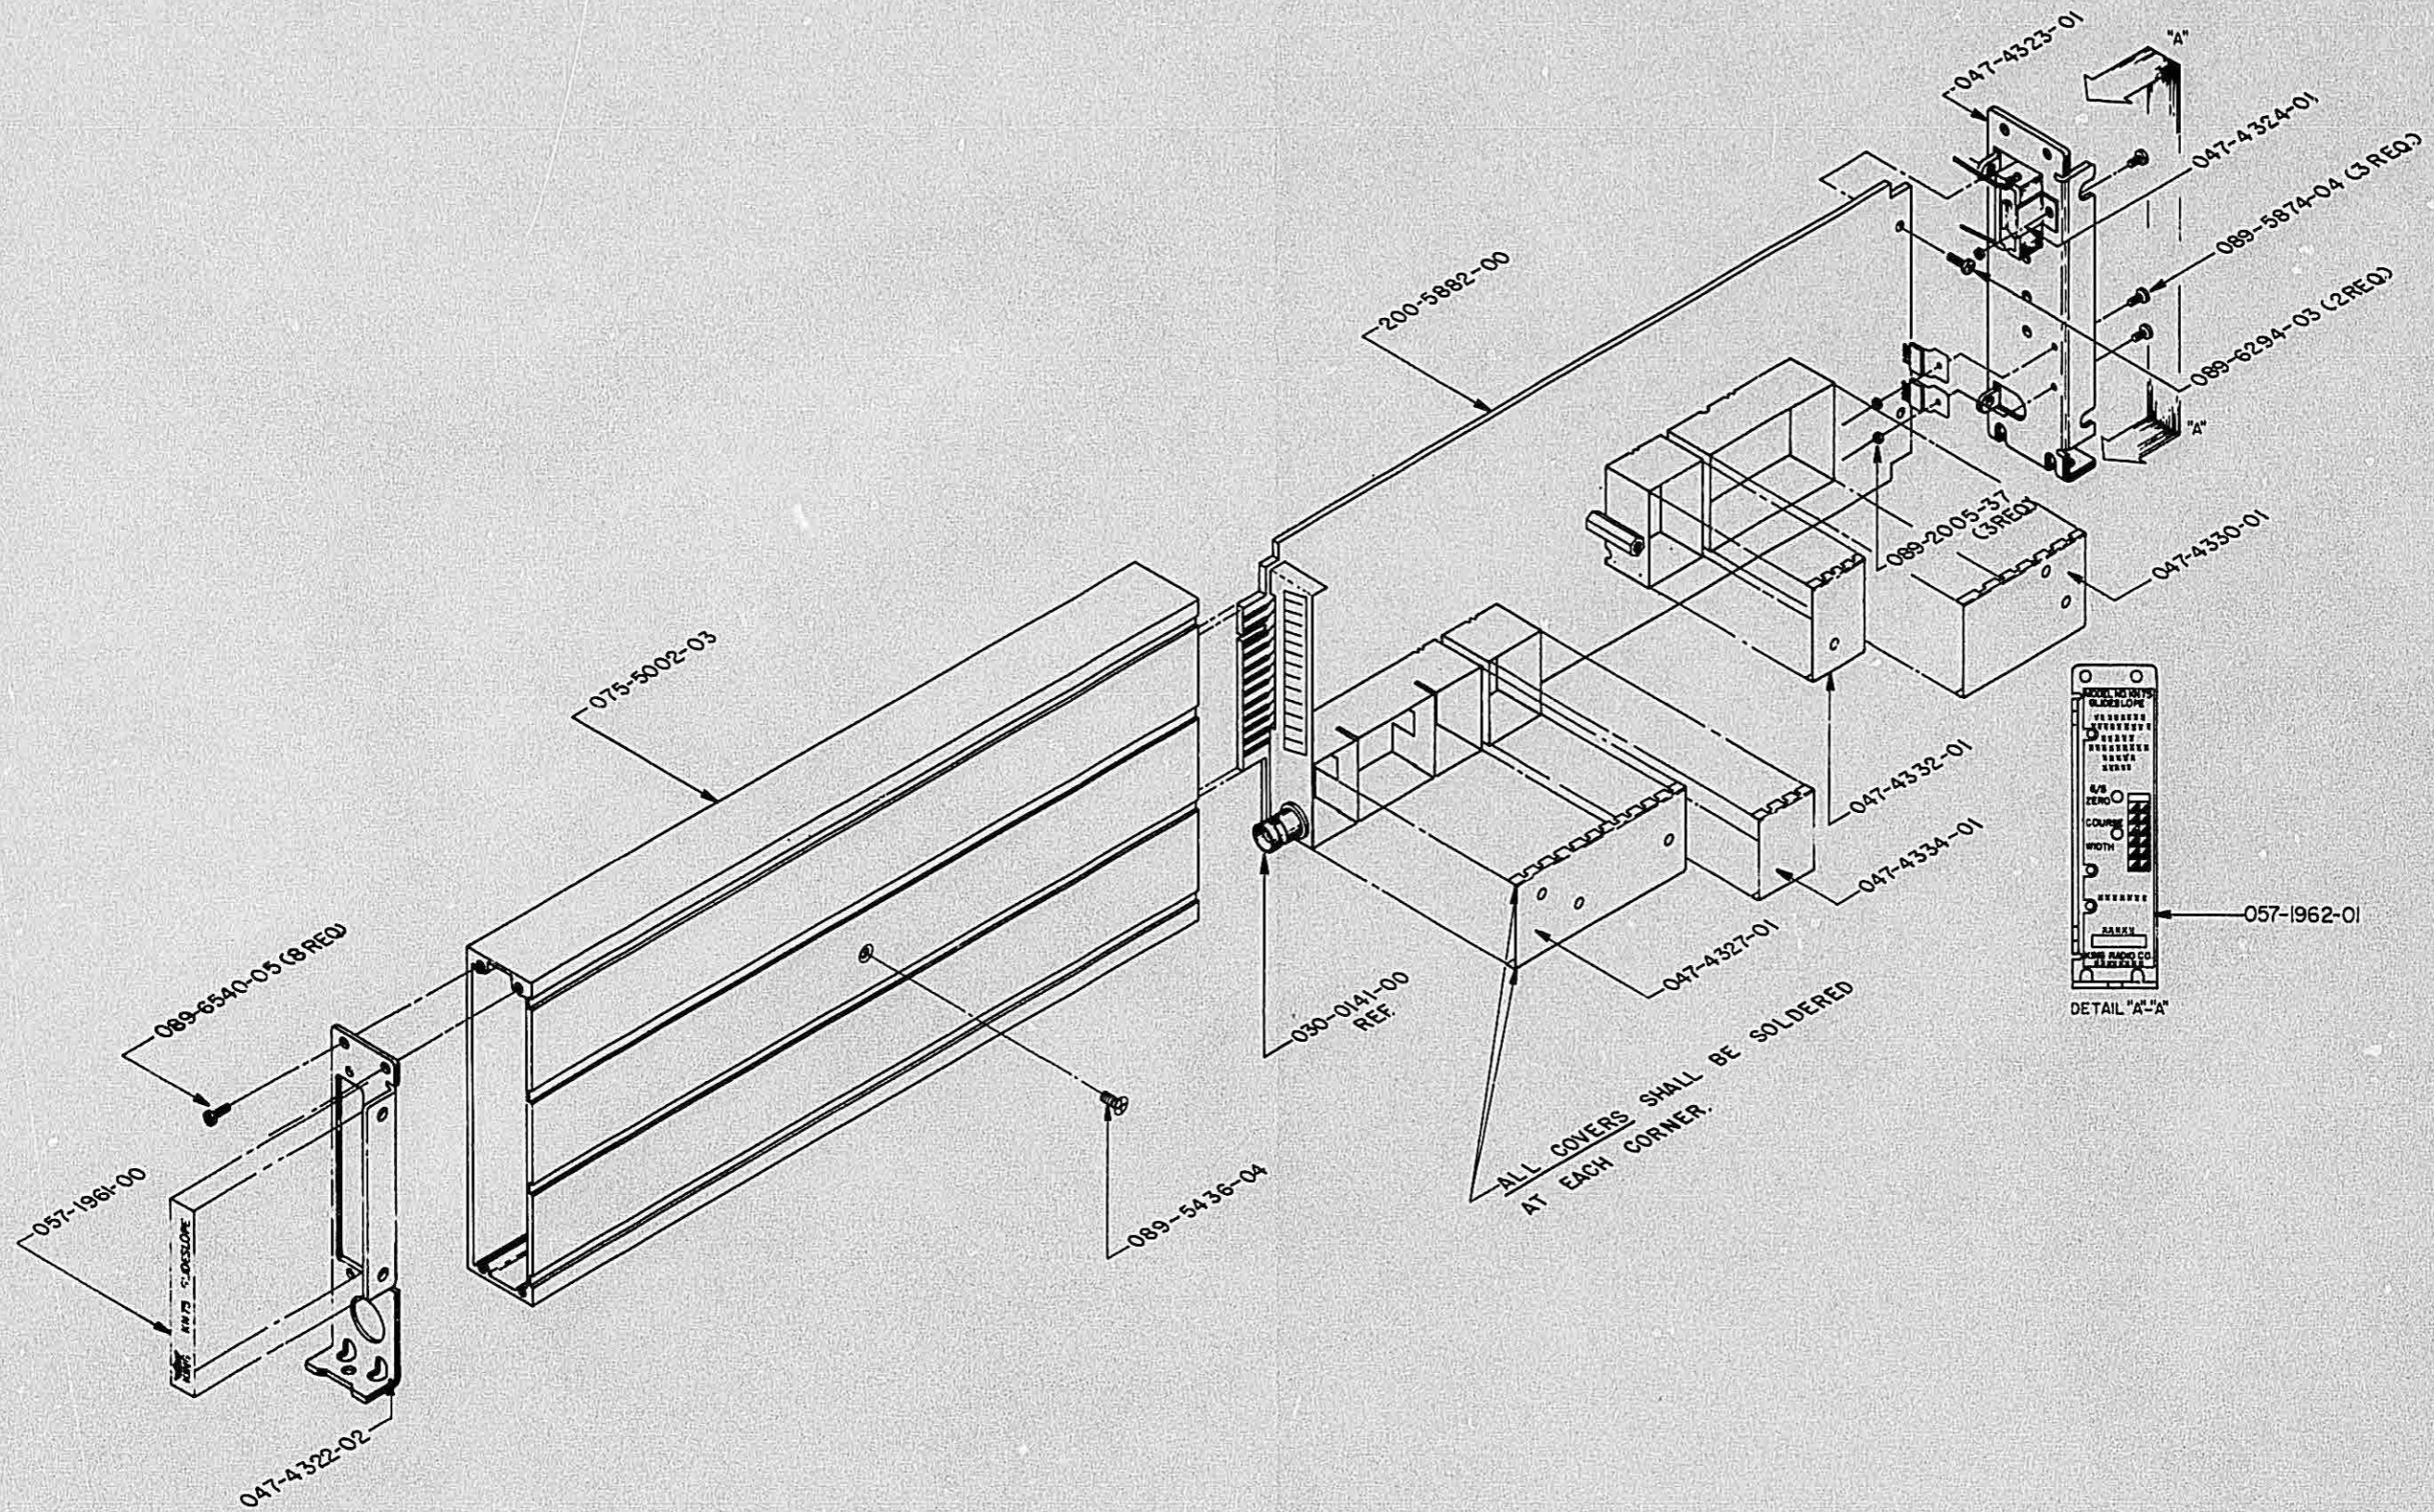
FINAL ASSEMBLY DRAWING
